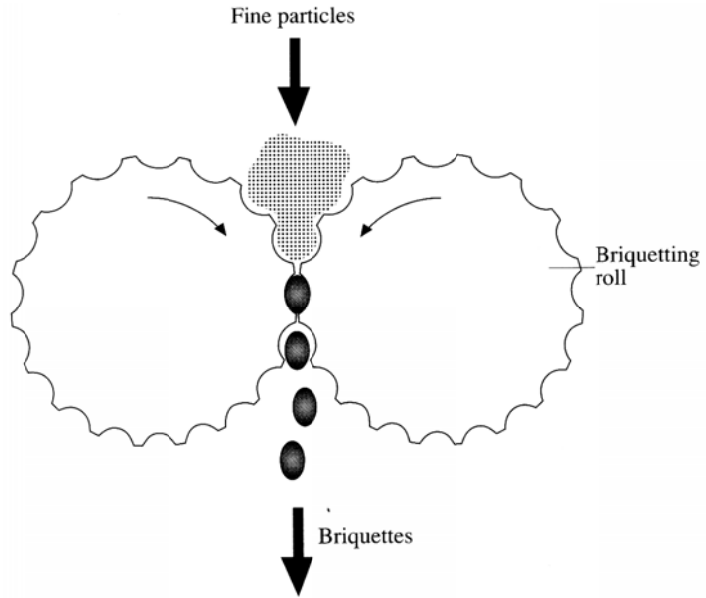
Roll briquetting press, gravity feed [Woolacott and Eric].
